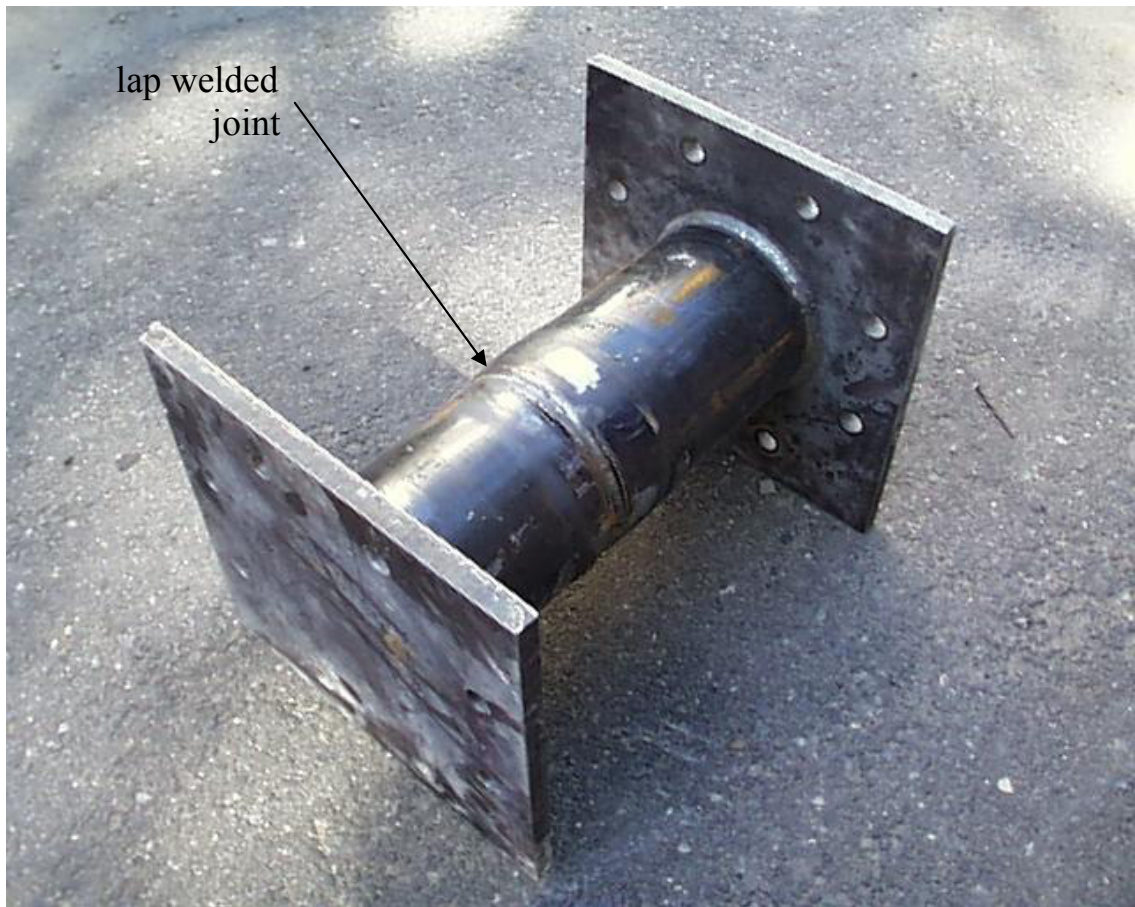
Steel Pipe with Lap-Welded Joint
